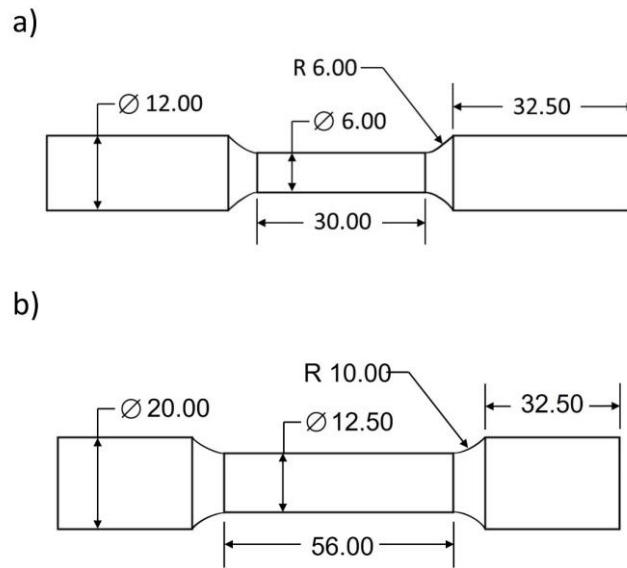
Schematic drawing of a) subsize and b) standard tension test specimens.
